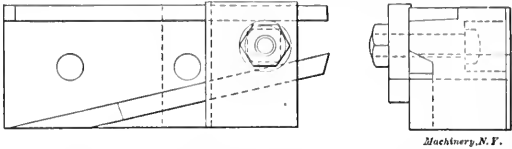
Tool for Squaring the Sides and Cutting Off.
